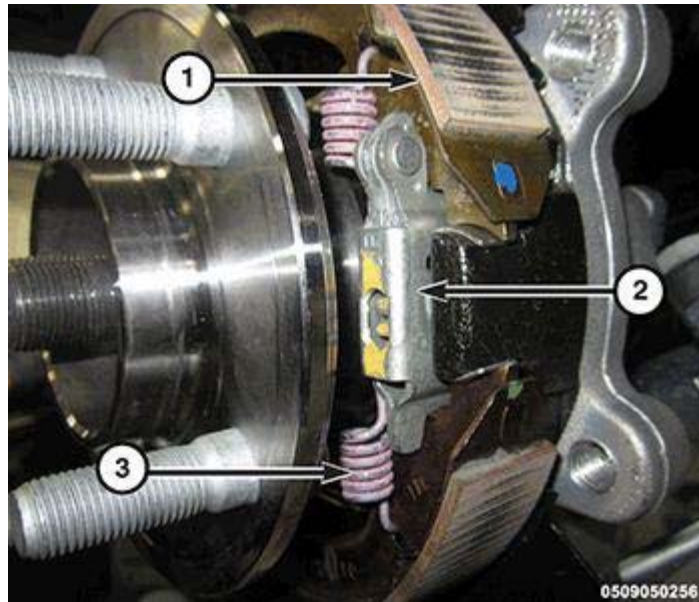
Upper Shoe, Actuator Lever & Return Spring
